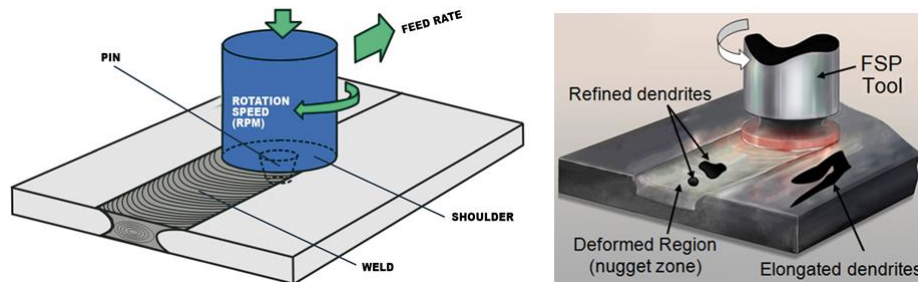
Friction Stir Welding (left) and Friction Stir Processing (right) - Courtesy of [1-8, 1-9]
